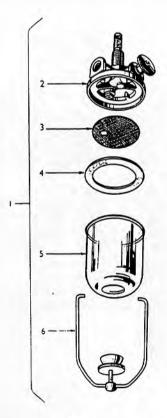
FIG. I EXPLODED VIEW OF SEDIMENT BOWL
